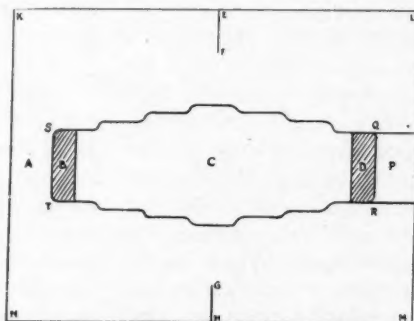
Single-Piece Silver Paper Packing for Chocolate Shield.
